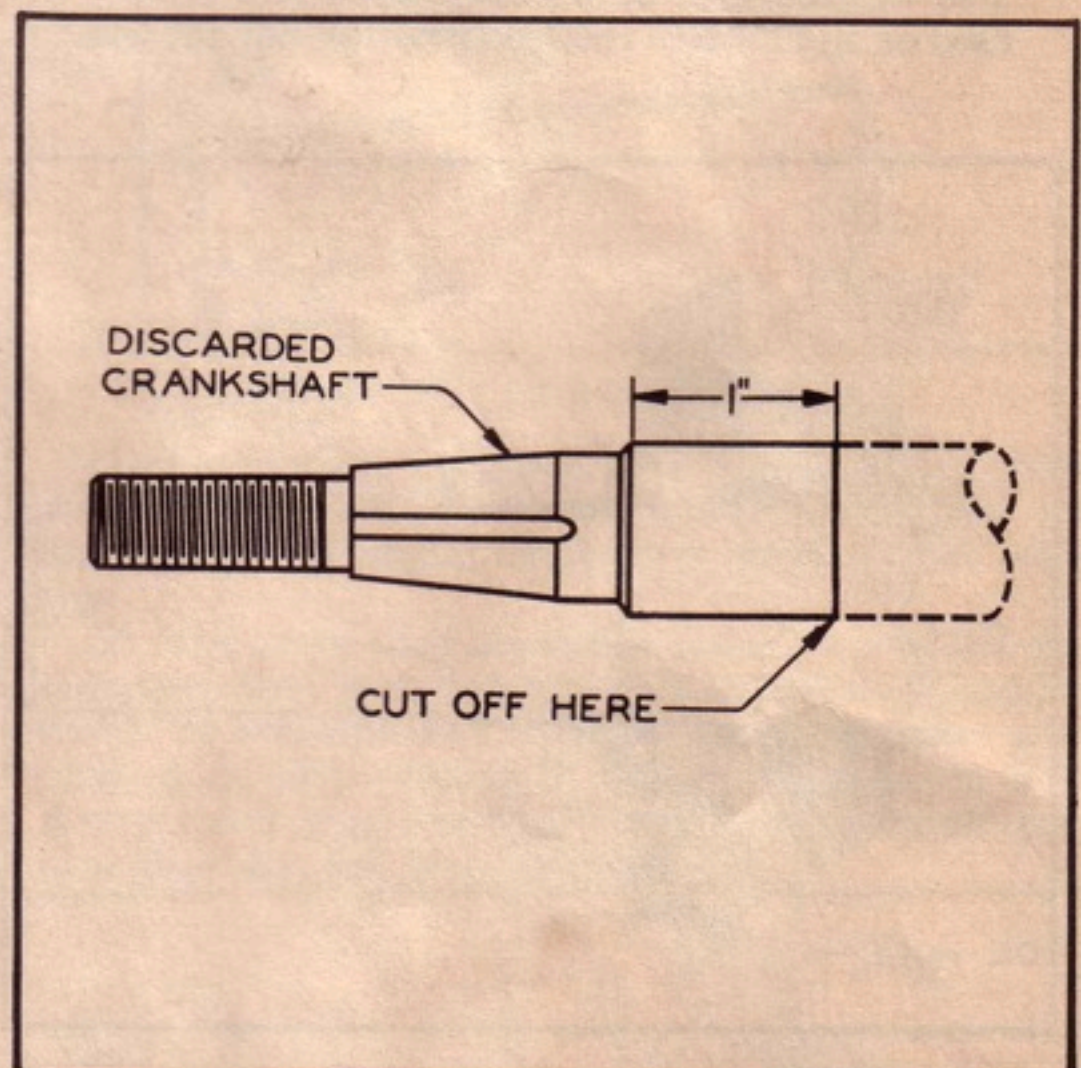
Bearing-Removing Tool Constructed From Discarded Crankshaft
